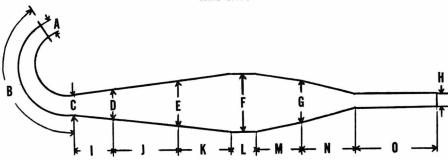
An expansion chamber constructed to this set of specifications will produce a high RPM (peaky) performing engine.
